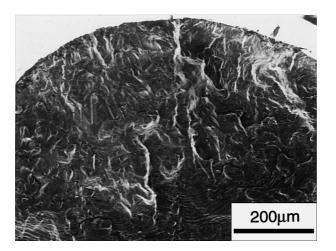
Fracture surface of a fatigue tested specimen.
